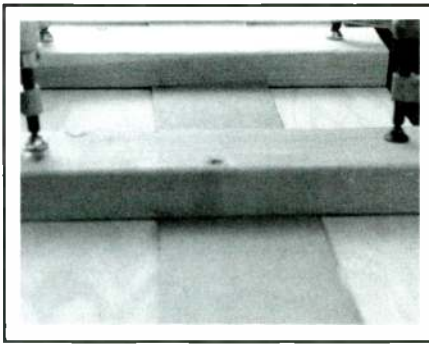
Clamping side veneer panel. Cardboard strip under clamping blocks centers pressure.
